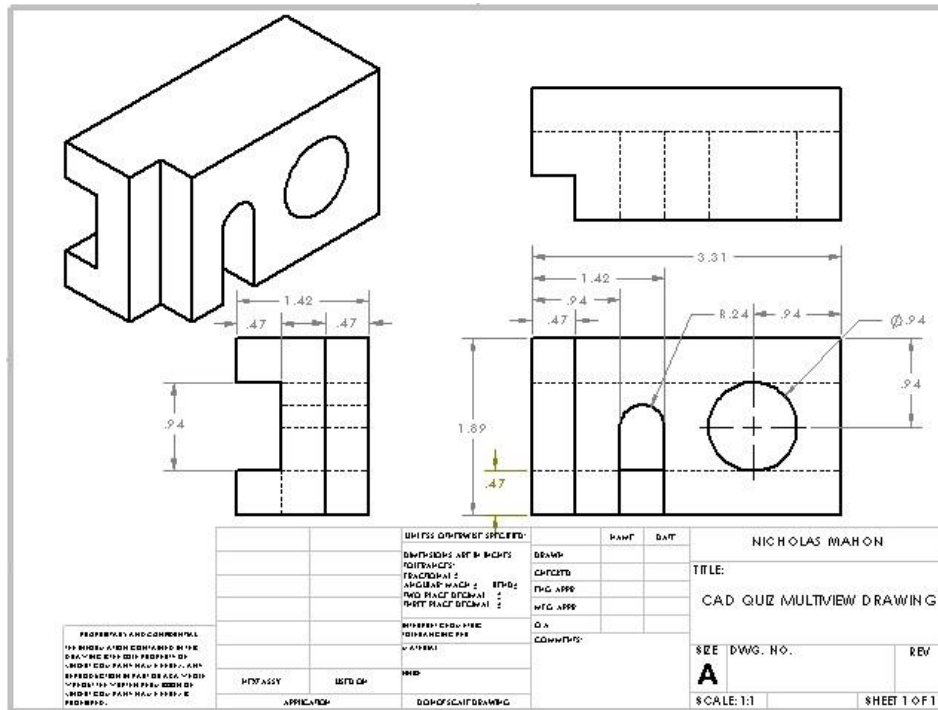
Students for the CAD Quiz were given a Multiview drawing a told to recreate it in Solidworks. Here is the result.
